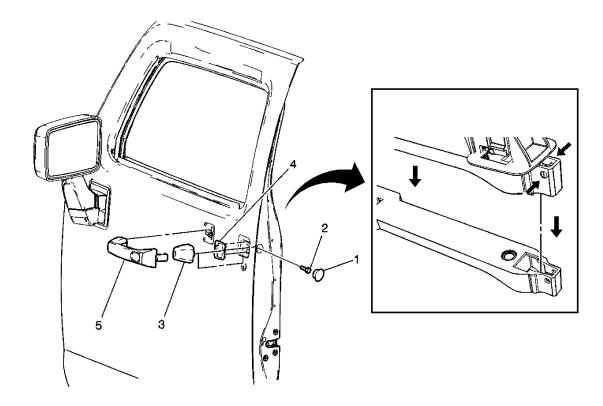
Door Handle Replacement - Front Outside Courtesy of GENERAL MOTORS CORP.
